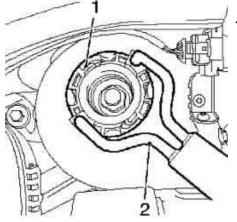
Puller for locking rings: 1 - retaining rings, 2 - smnik
